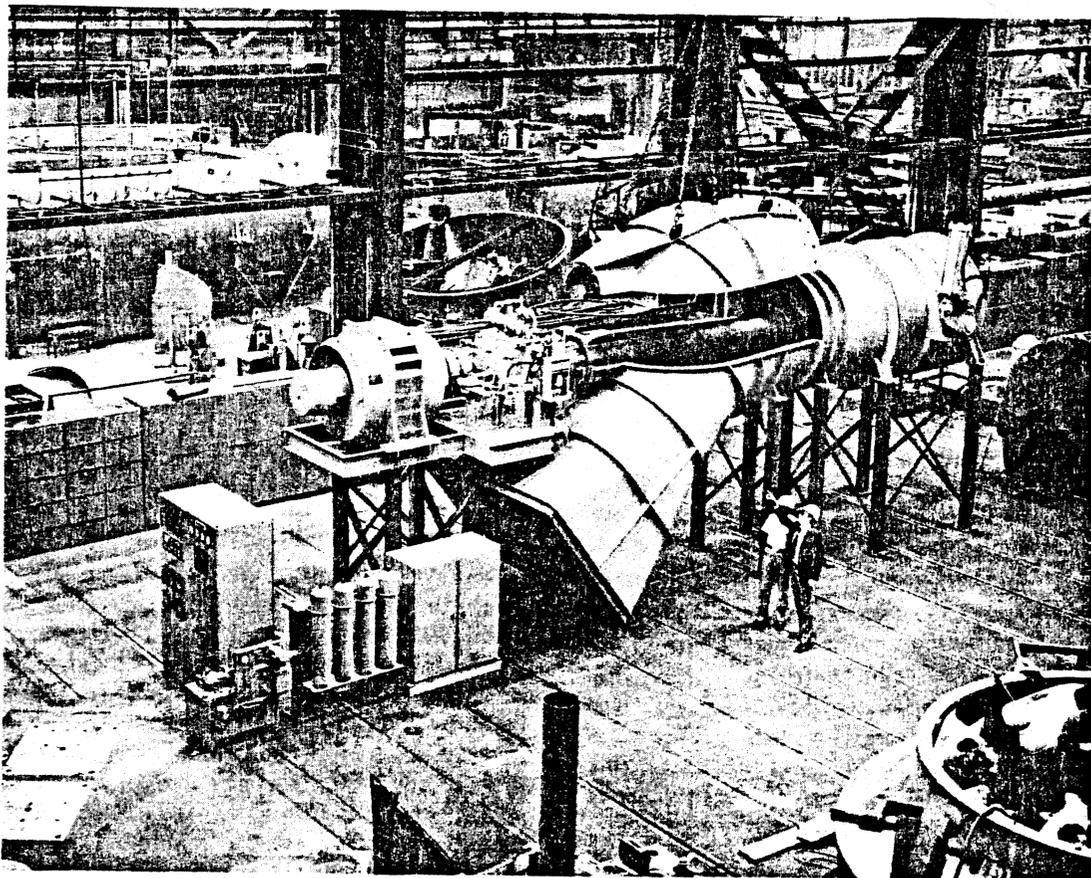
Shop assembly of a standardize tube turbine. (Courtesy of Allis Chalmers Corporation).
